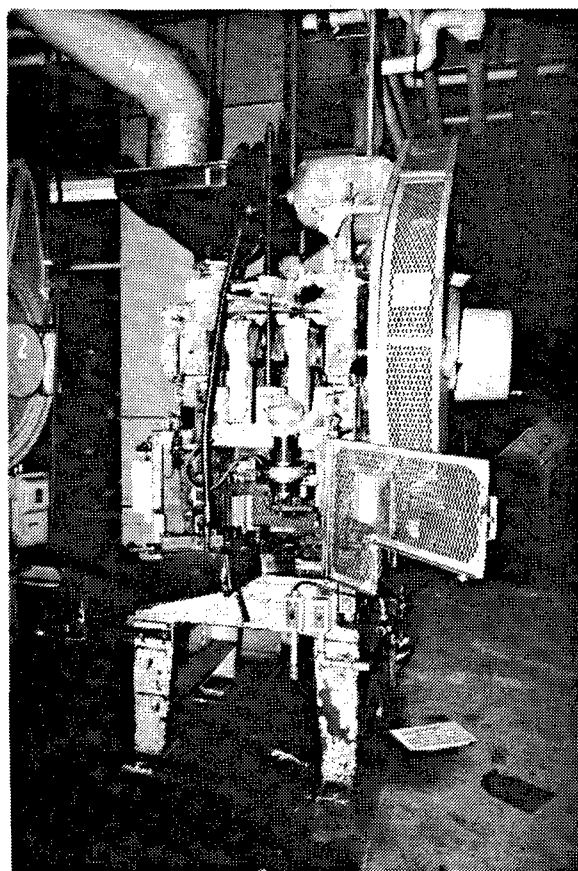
Building 102: Taper and Plug Machine manufactured in 1942 by the E.W. Bliss Company.
